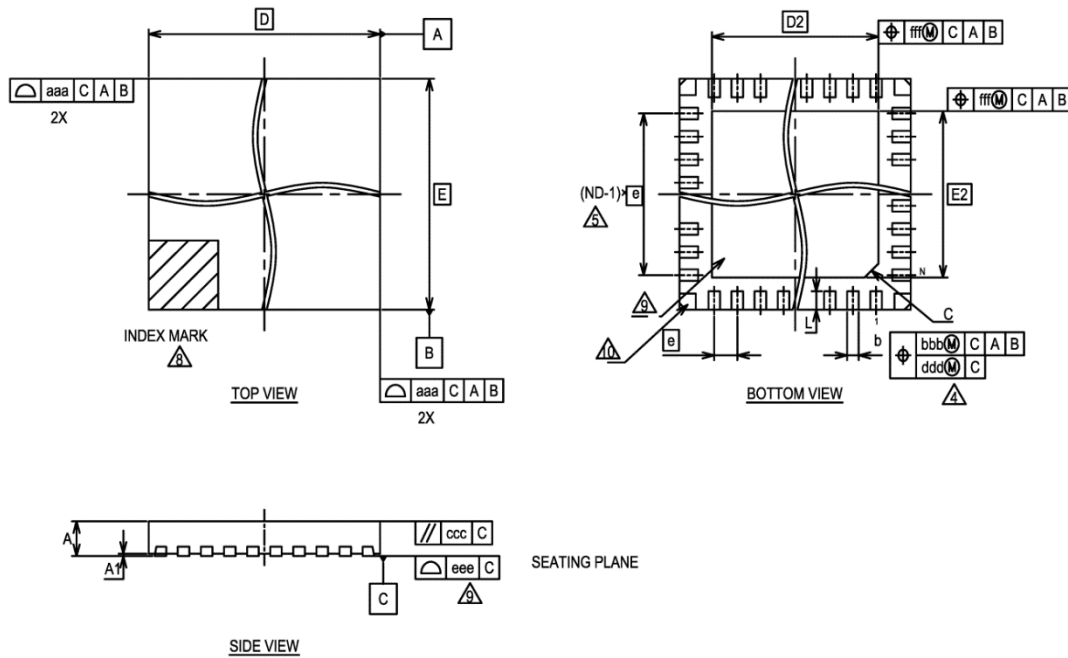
Package Dimensions of S6AE103A (VNF024)
